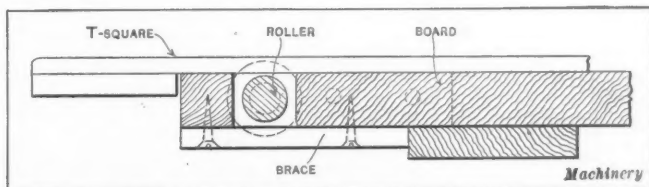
Cross-sectional View of One End of Drawing Board to a Larger Scale
